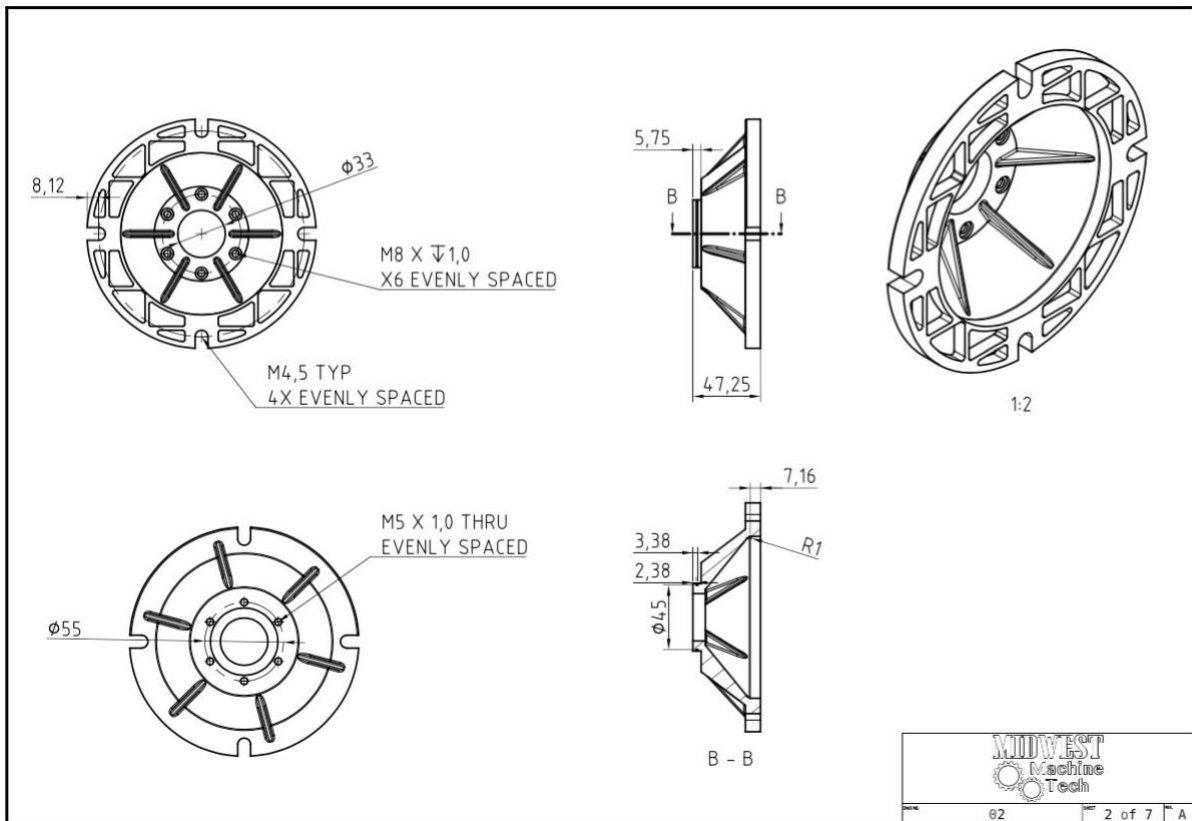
Two-dimensional construction drawing of the finished flange
